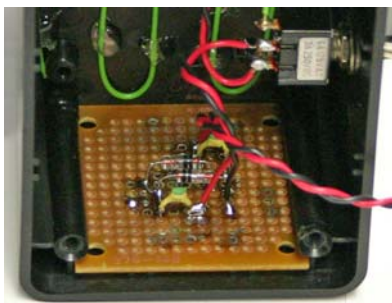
The few parts mounted on the copper side of a Radio Shack experimenter board.
